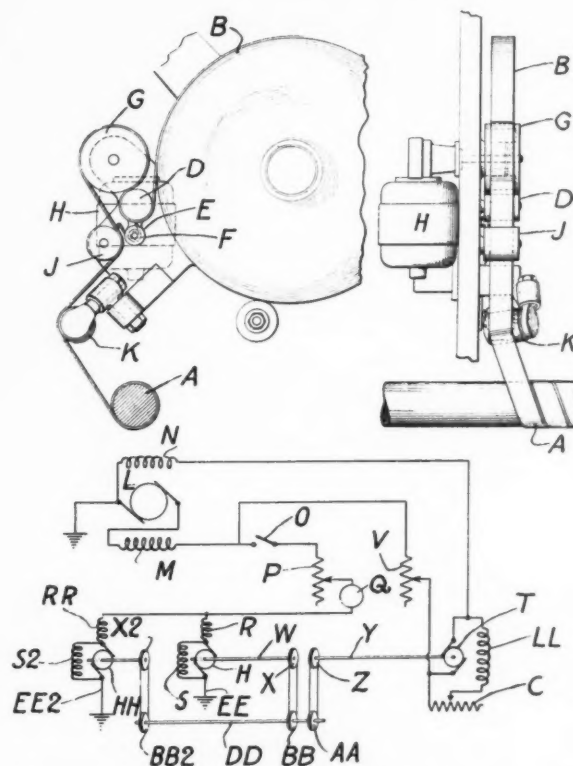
Electric drive to wire covering machine maintains uniform tension on insulating strip
